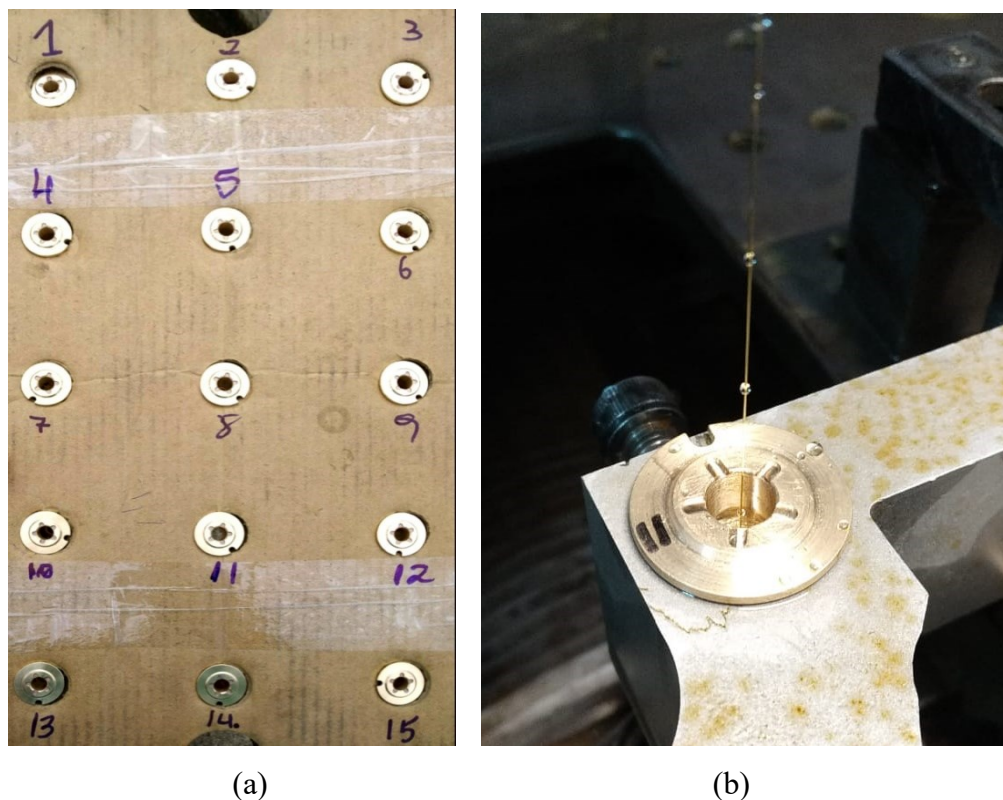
(a) Journal bearings without axial grooves and (b) wire EDM machining manufacturing the different axial grooves shapes
